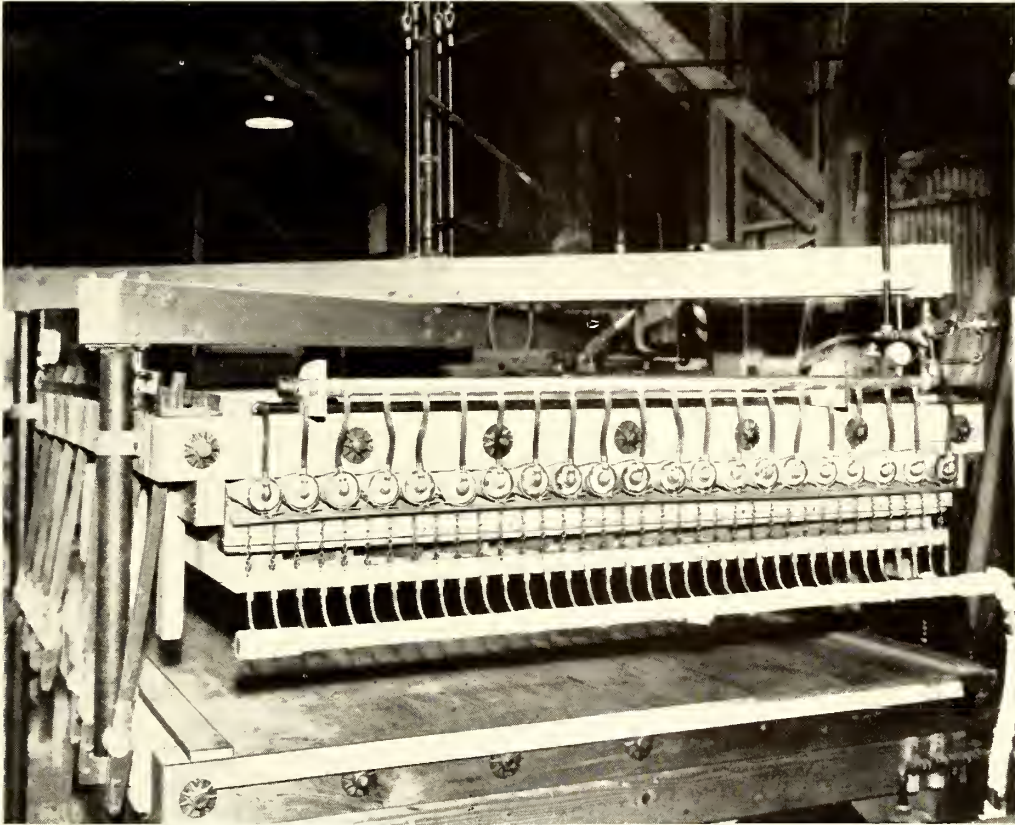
Specially designed, steam-heated hot press used to glue plywood to framing.
